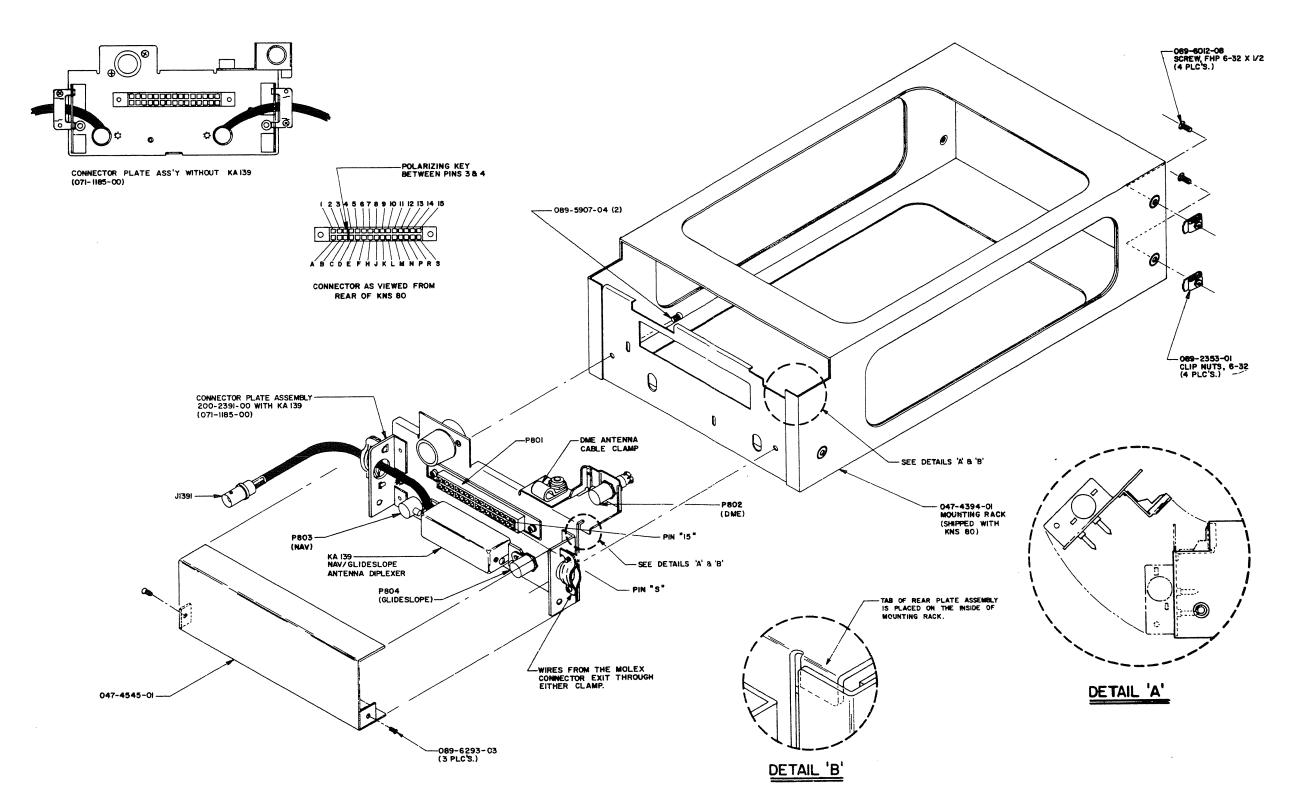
KNS 80 INSTALLATION ASSEMBLY (Dwg. No. 155-5295-00, R-5) (Sheet 1 of 2)
